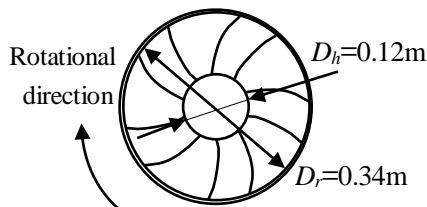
Appearance of test rotor. This kind of rotor is commonly used for vehicle cooling fan.
